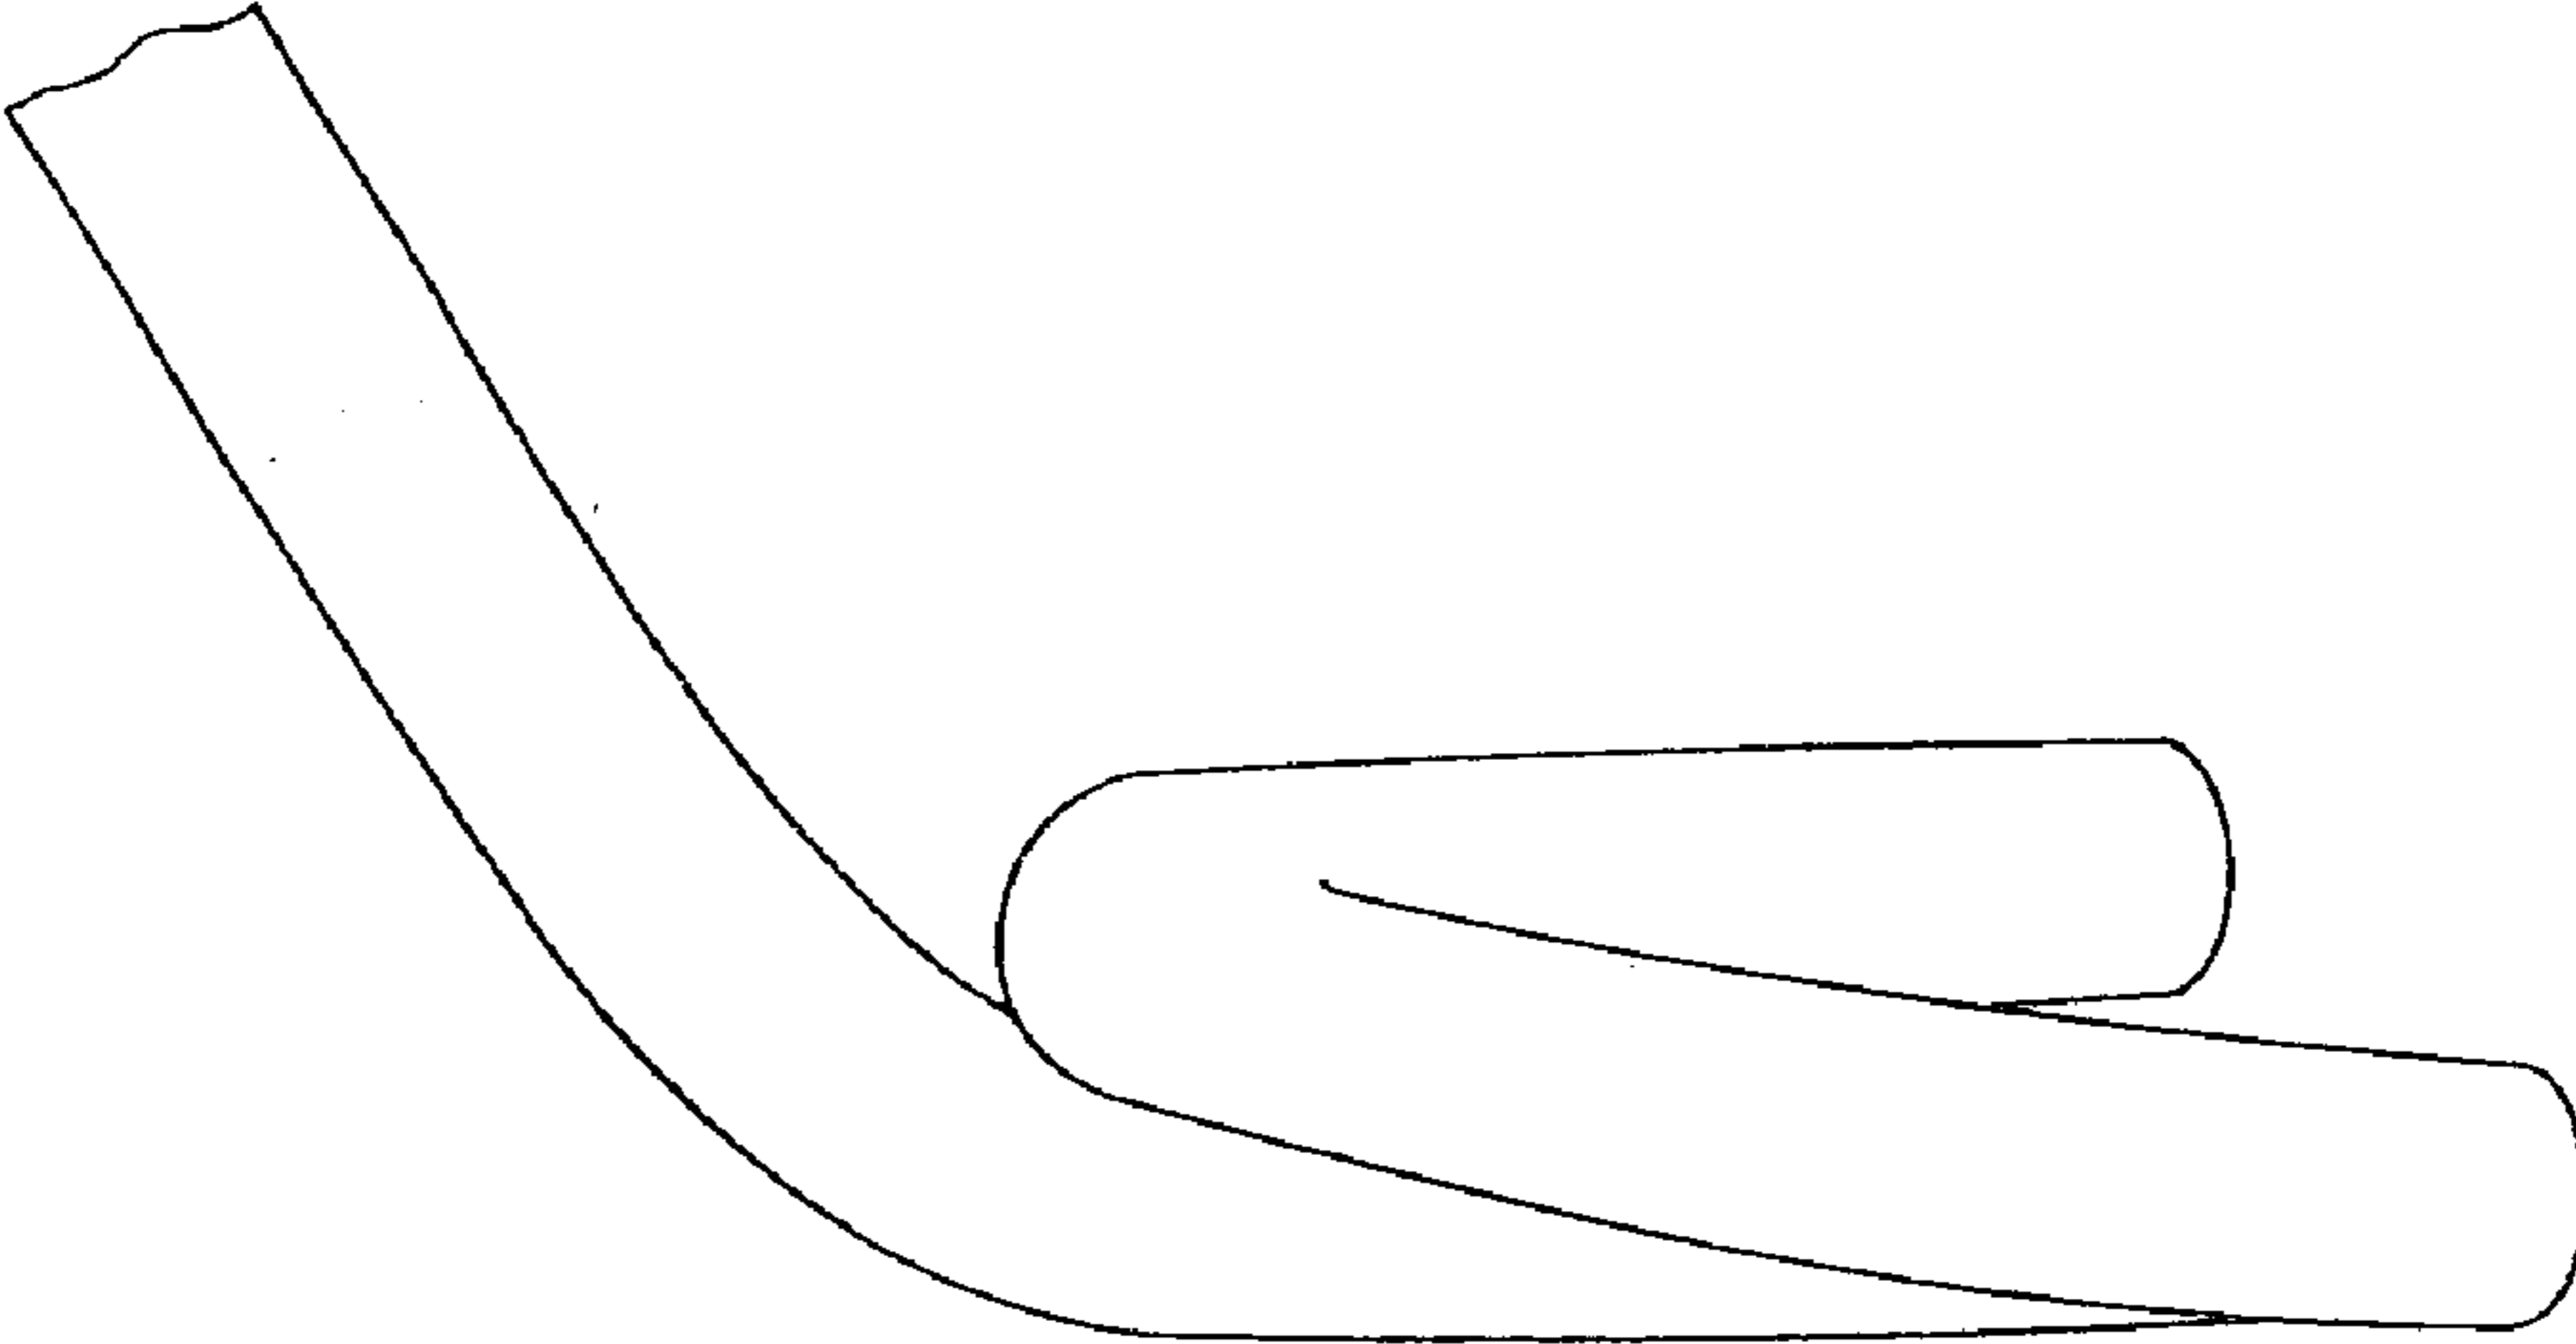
is an enlarged bottom plan view of the head portion; and,
